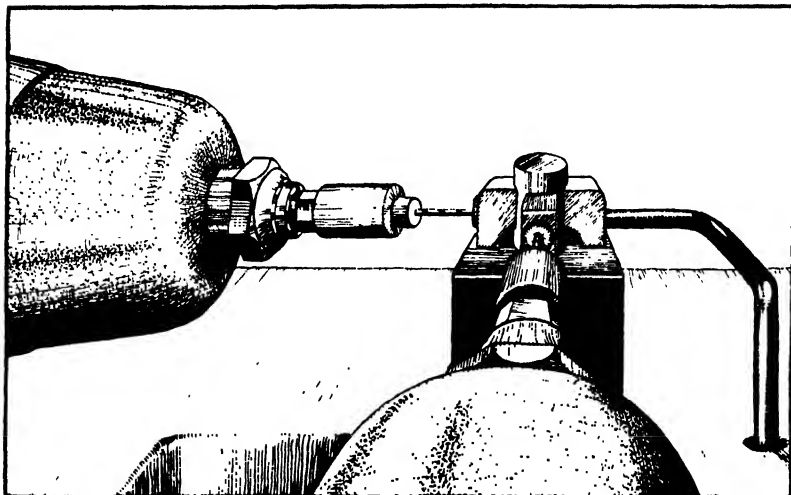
Drilling two holes simultaneously. The necessity for re-positioning the part and drilling the second hole separately can be avoided by using drills driven by portable grinders which are equipped with automatic feeding devices.
